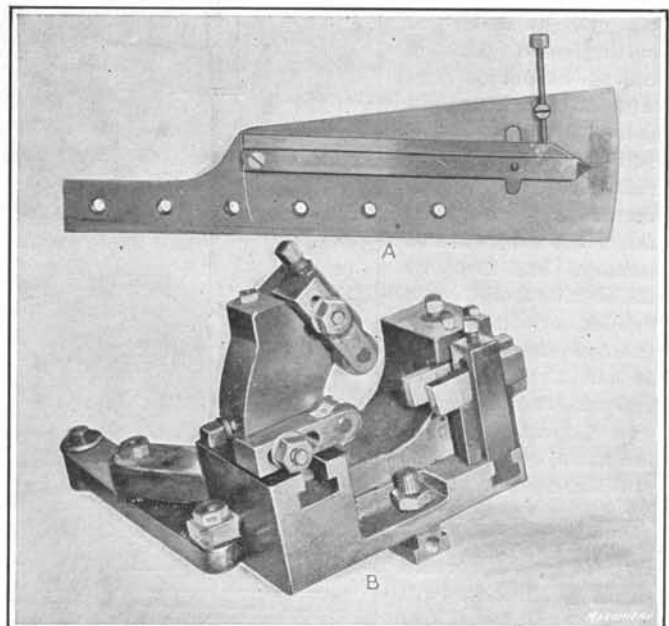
Taper-turning Tool and Guide used on a Gridley Turret Lathe
